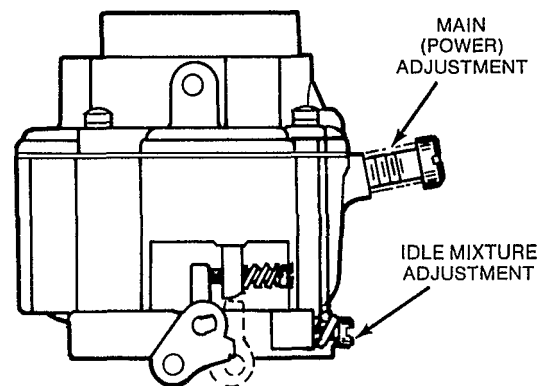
CARBURETOR FUEL MIXTURE ADJUSTMENTS
